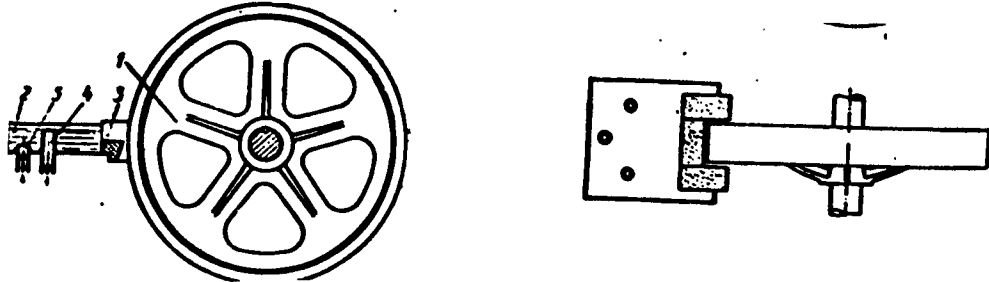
Heating in an electrolyte of the rim of a support roller with the application of a shielding bushing: 1 - roller; 2 - electrolyte; 3 - shielding bushing; 4 - electrolyte withdrawal; 5 - electrolyte supply
